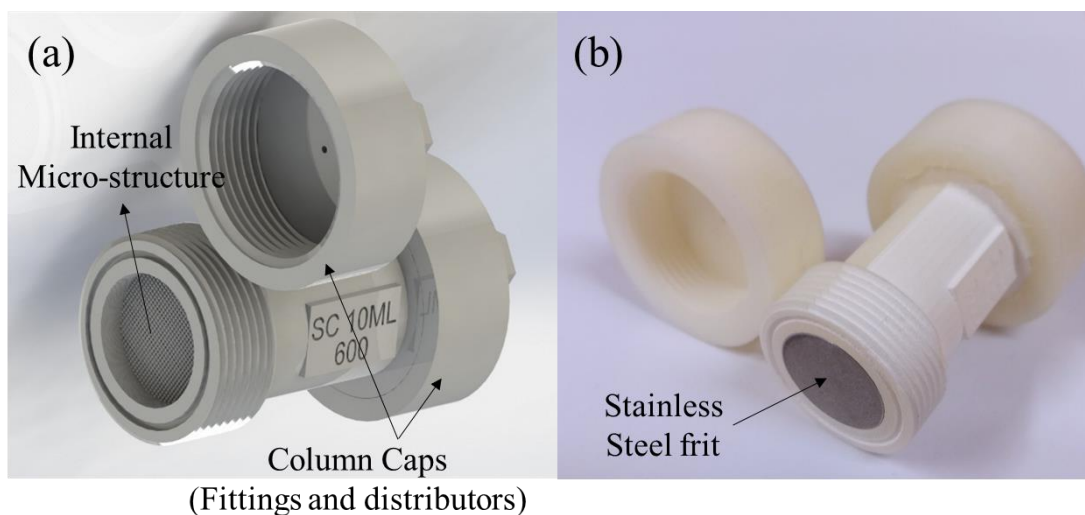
(a) CAD rendering of 3D column assembly for a column containing spheres in a simple cubic arrangement, (b) 3D-printed column assembly, the stainless steel frit is visible at one end of the column.
